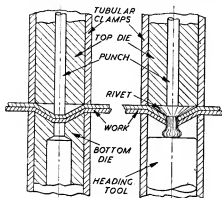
A similar riveting process in which the drawing and piercing of the sheets is performed by a separate punch.
